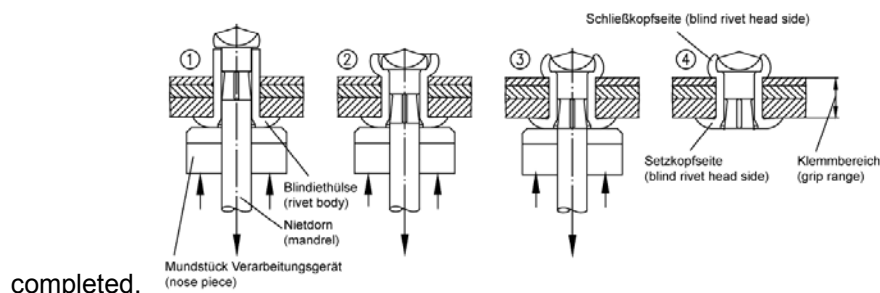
Figure ZZZ: Blind rivet setting operation (3rd picture: rivet head visible side)
